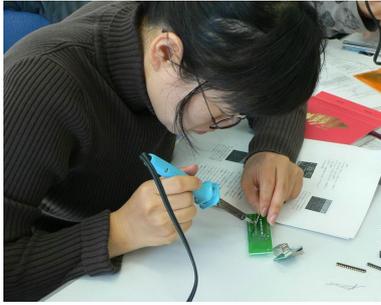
A student is soldering to assemble her own I/O module. Most participants had some soldering experience in junior high.
